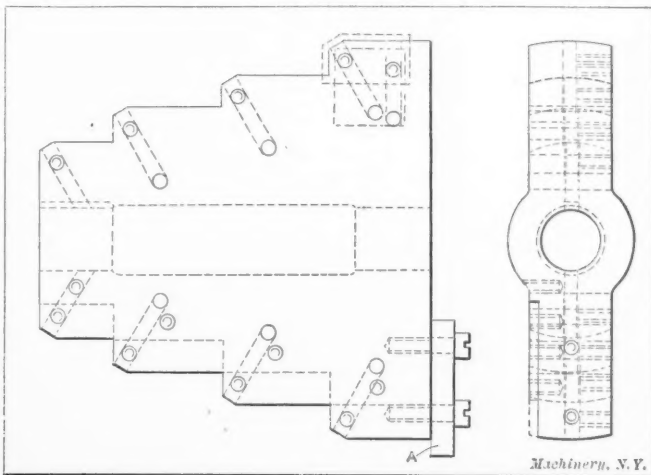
Boring Head used for Boring and Facing Inside of Cone-pulley Steps
